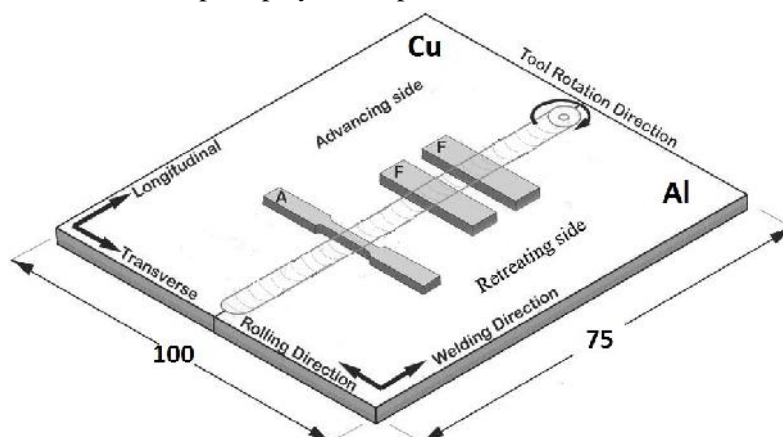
Fig shows the experimental setup and welded joint
